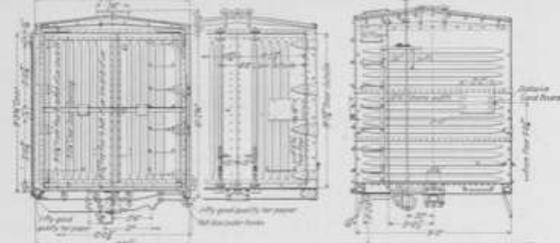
End Elevations. Automobile Car Shown in Figs. 43 and 45.
